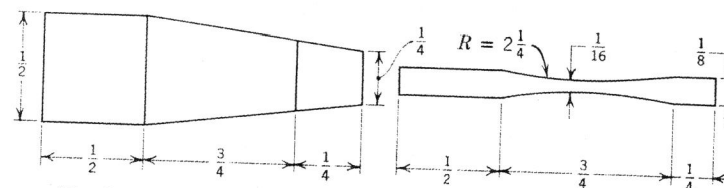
Bending fatigue specimen. All dimensions are in inches.
